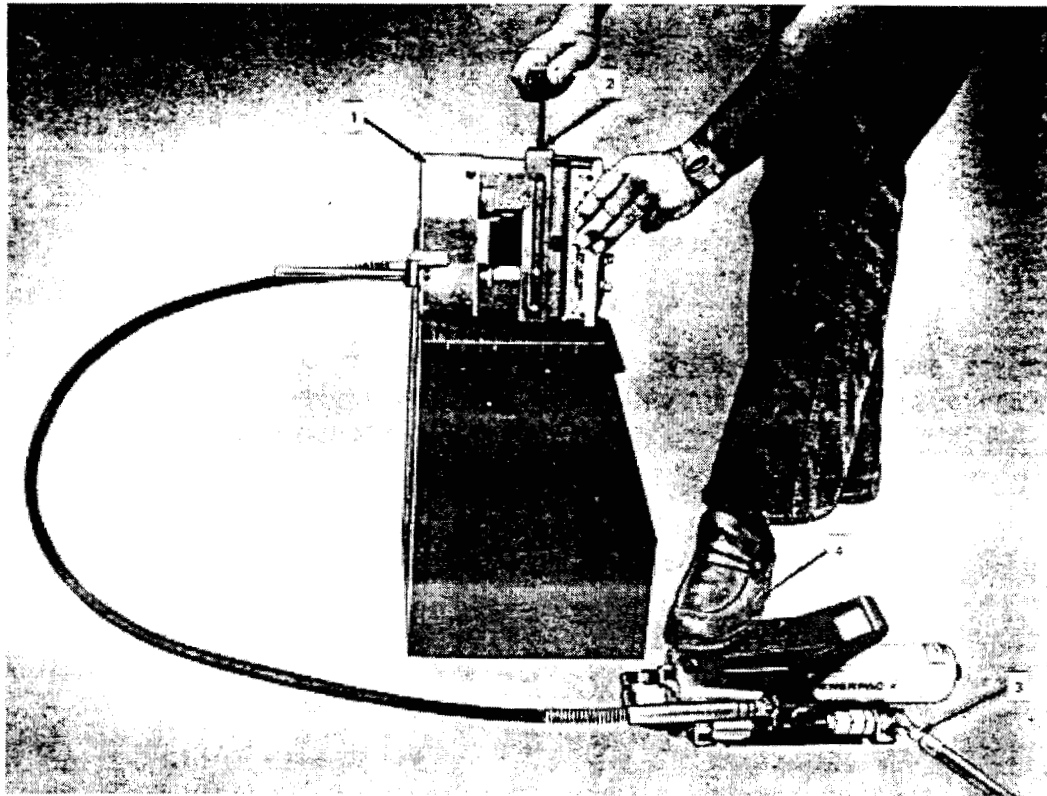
Purging Air From Pump (ENERPAC PA 131-SP)
